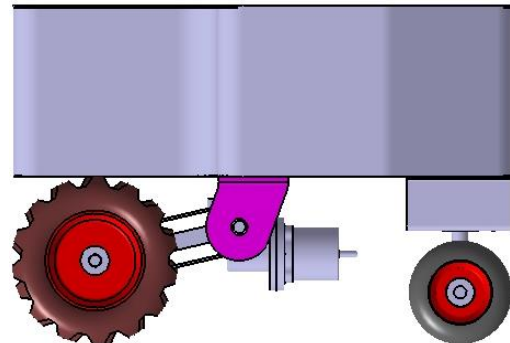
WSS MOBILE PLATFORM CAD DESIGN
